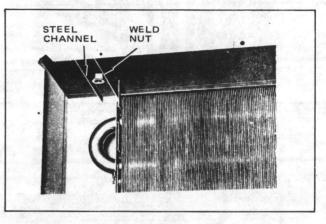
Model S Unit Mounting Channel and Weld Nut
